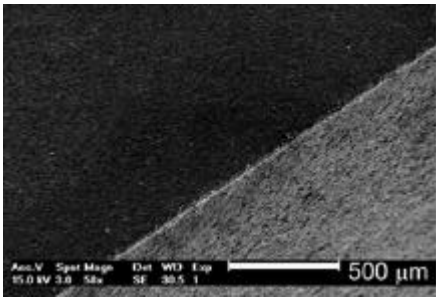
Edge of a machine-tool insert cut in CBN as machined by the waterjet guided laser (without subsequent polishing)
